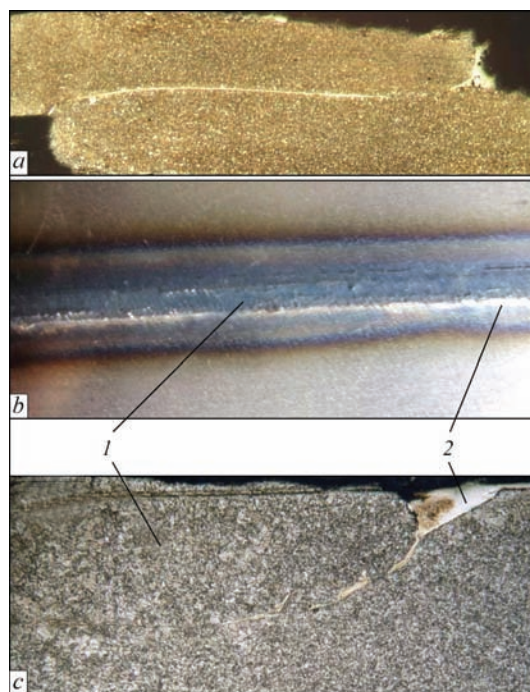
Stages of forming bevel-butt weld on specimens of thin-walled spirally-welded pipes: *a* — cross-section of the weld at the initial stage of its formation; *b* — appearance of the formed welded joint (top view); *c* — cross-section of the formed bevel-butt weld at the final stage; 1 — metal squeezed out from the weld, unrolled over the pipe surface; 2 — activator squeezed out from the weld
